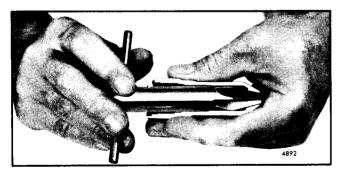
Cleaning Injector Nut Spray Tip Seat with Tool J 9418-5
